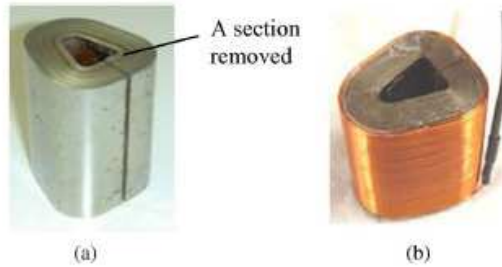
(a) AMM wound stator core, (b) assembly of AMM core and copper coil.
